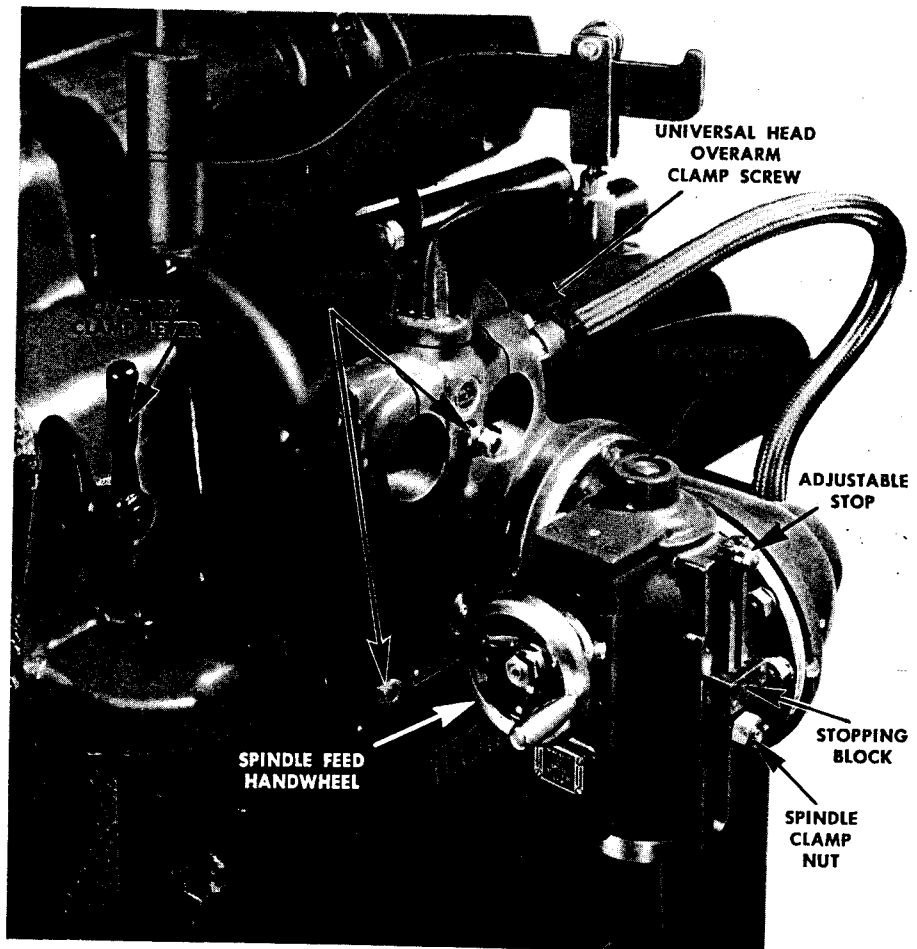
Right — Overarm clamp lever and universal head in storage position.
